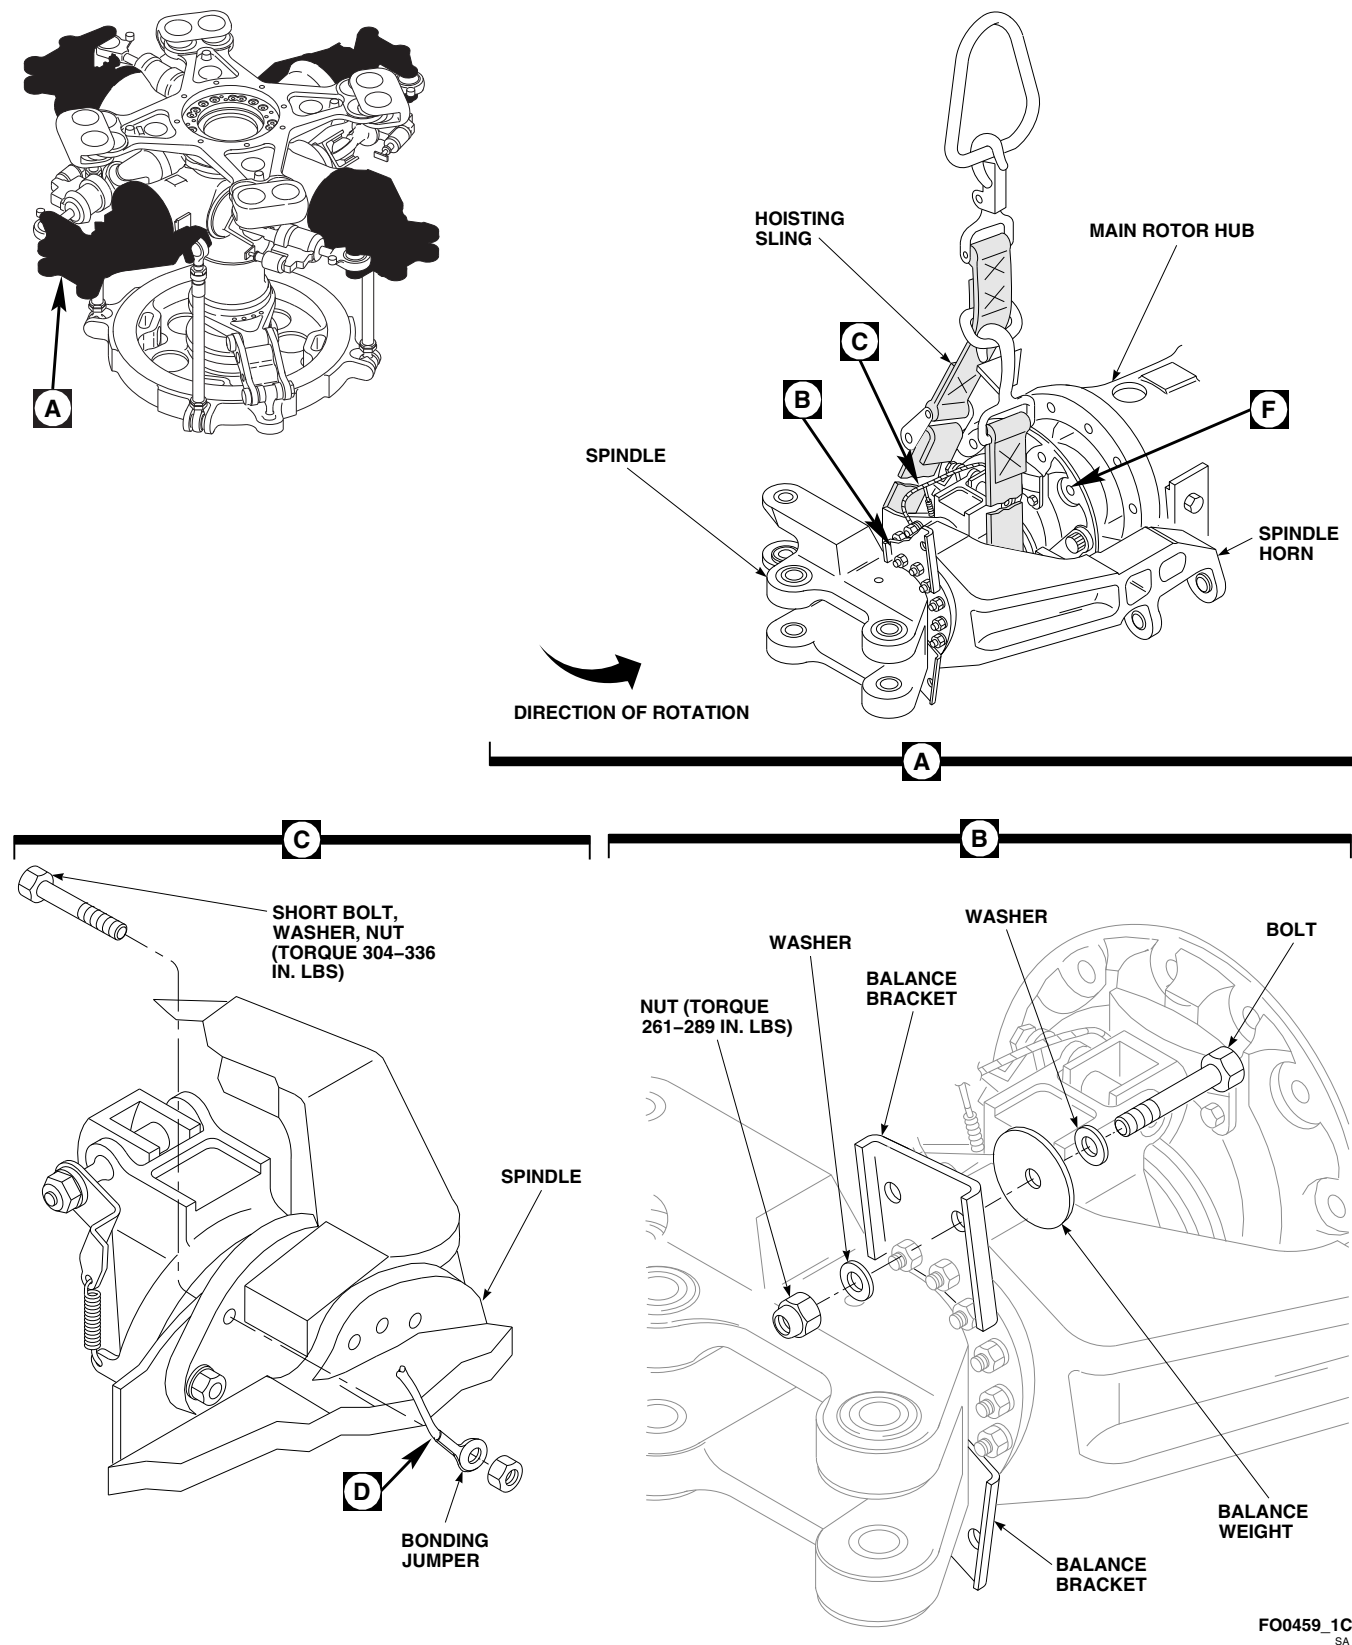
INSTALL SPINDLE (SHEET 1 OF 2)
